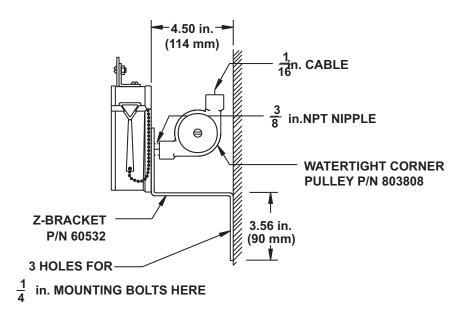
Pull Box, Break Glass used with Z-Bracket
